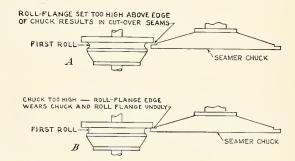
Incorrectly adjusted first-operation roll: A, Roll-flange set too high; B, Chuck too high.
